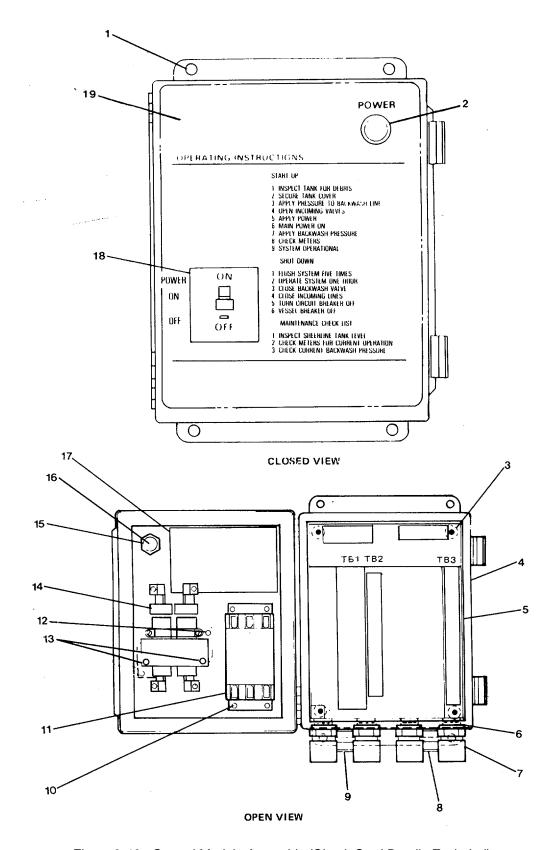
Control Module Assembly (Circuit Card Details Excluded).
